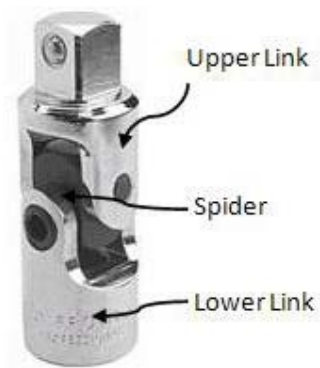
Universal Joint (Stanley-Proto J5470A).
